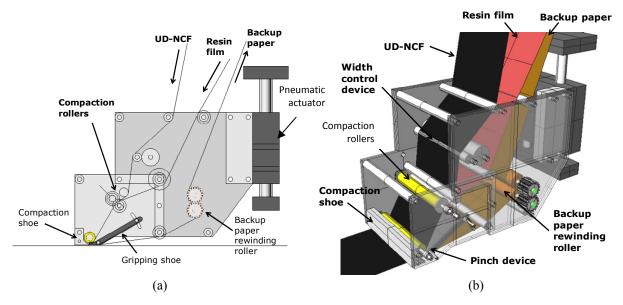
Schematic drawing of the CMTS head module: (a) side view, (b) perspective view.
